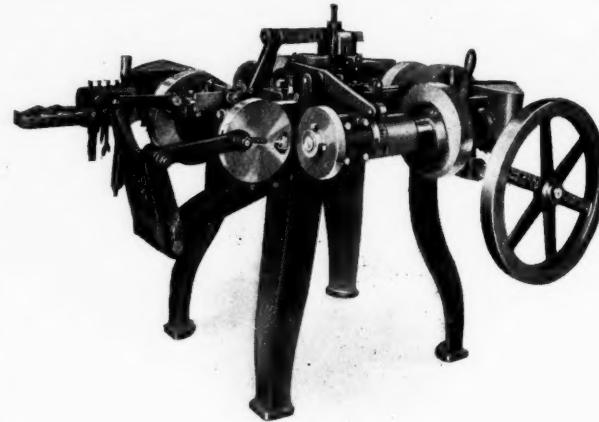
The Baird Four-slide Automatic Forming Machine for Wire Goods.
